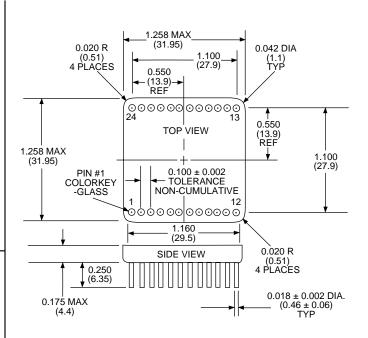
BUS-63102 AND BUS-63104 MECHANICAL OUTLINE 24-PIN SQUARE PACKAGE
